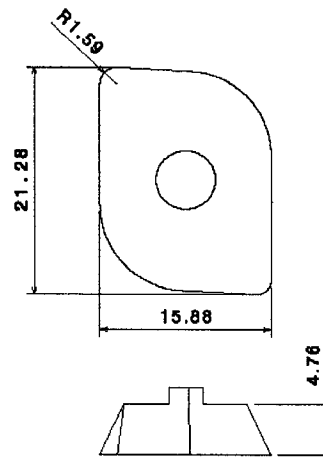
The inserts - geometry and dimensions (LFEW-R-LN)
